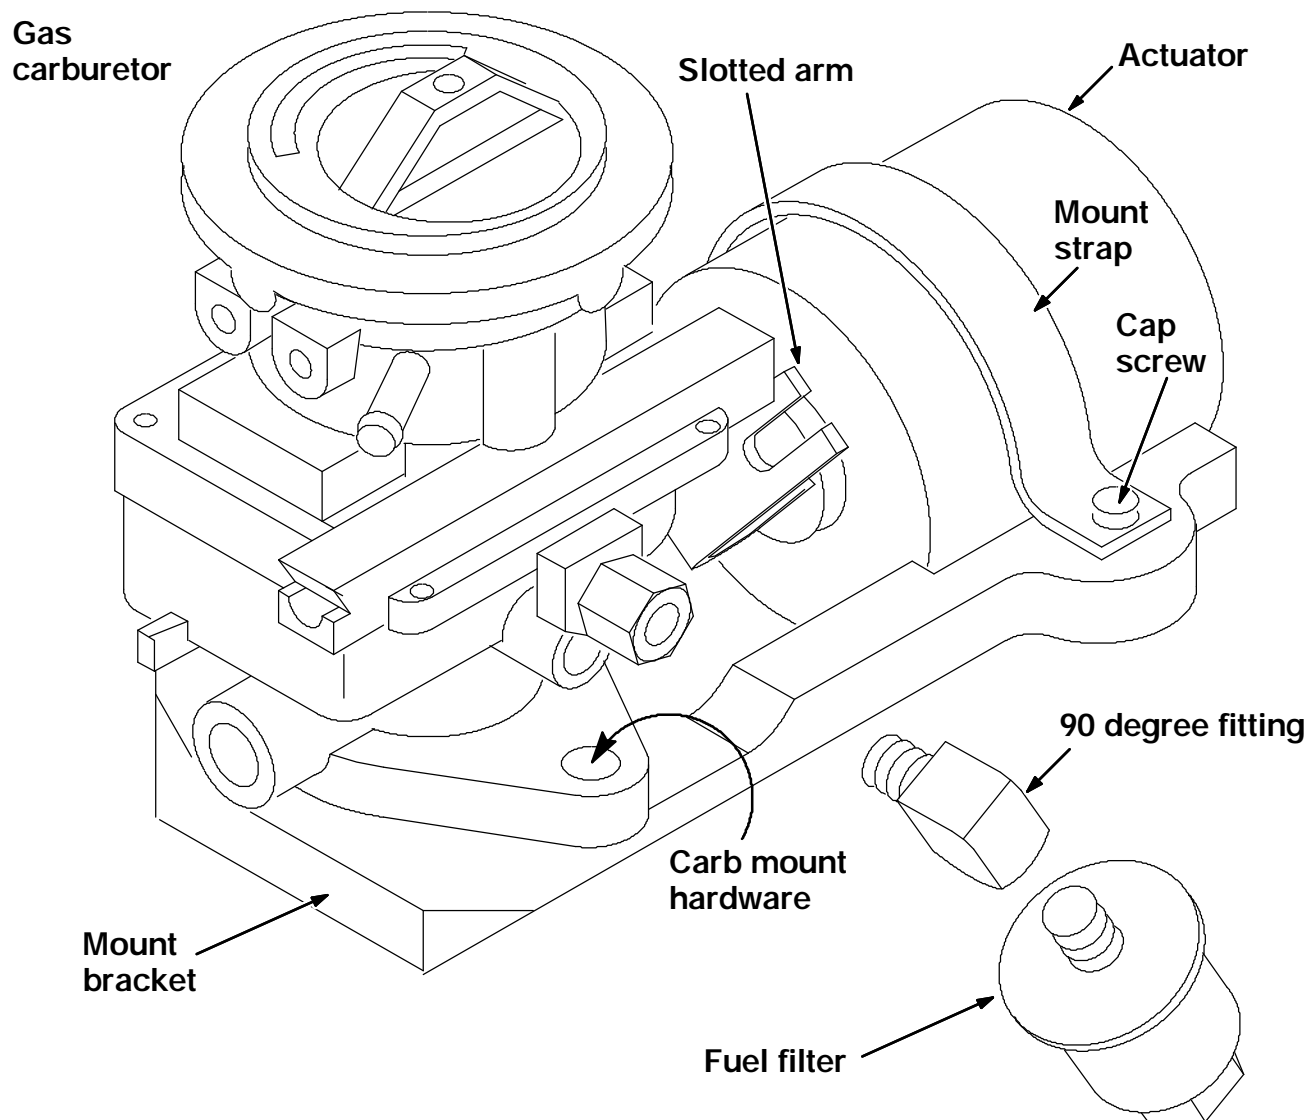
Gas Carburetor And Actuator Assembly (83639)
